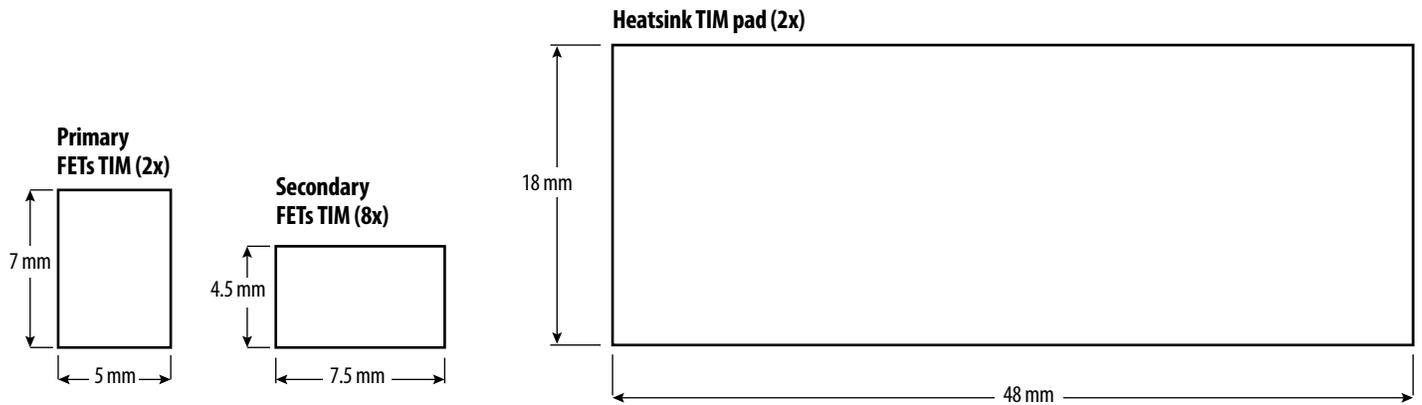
Drawings and dimensions of TIM pad cutouts for primary FETs, secondary FETs and heatsinks.
